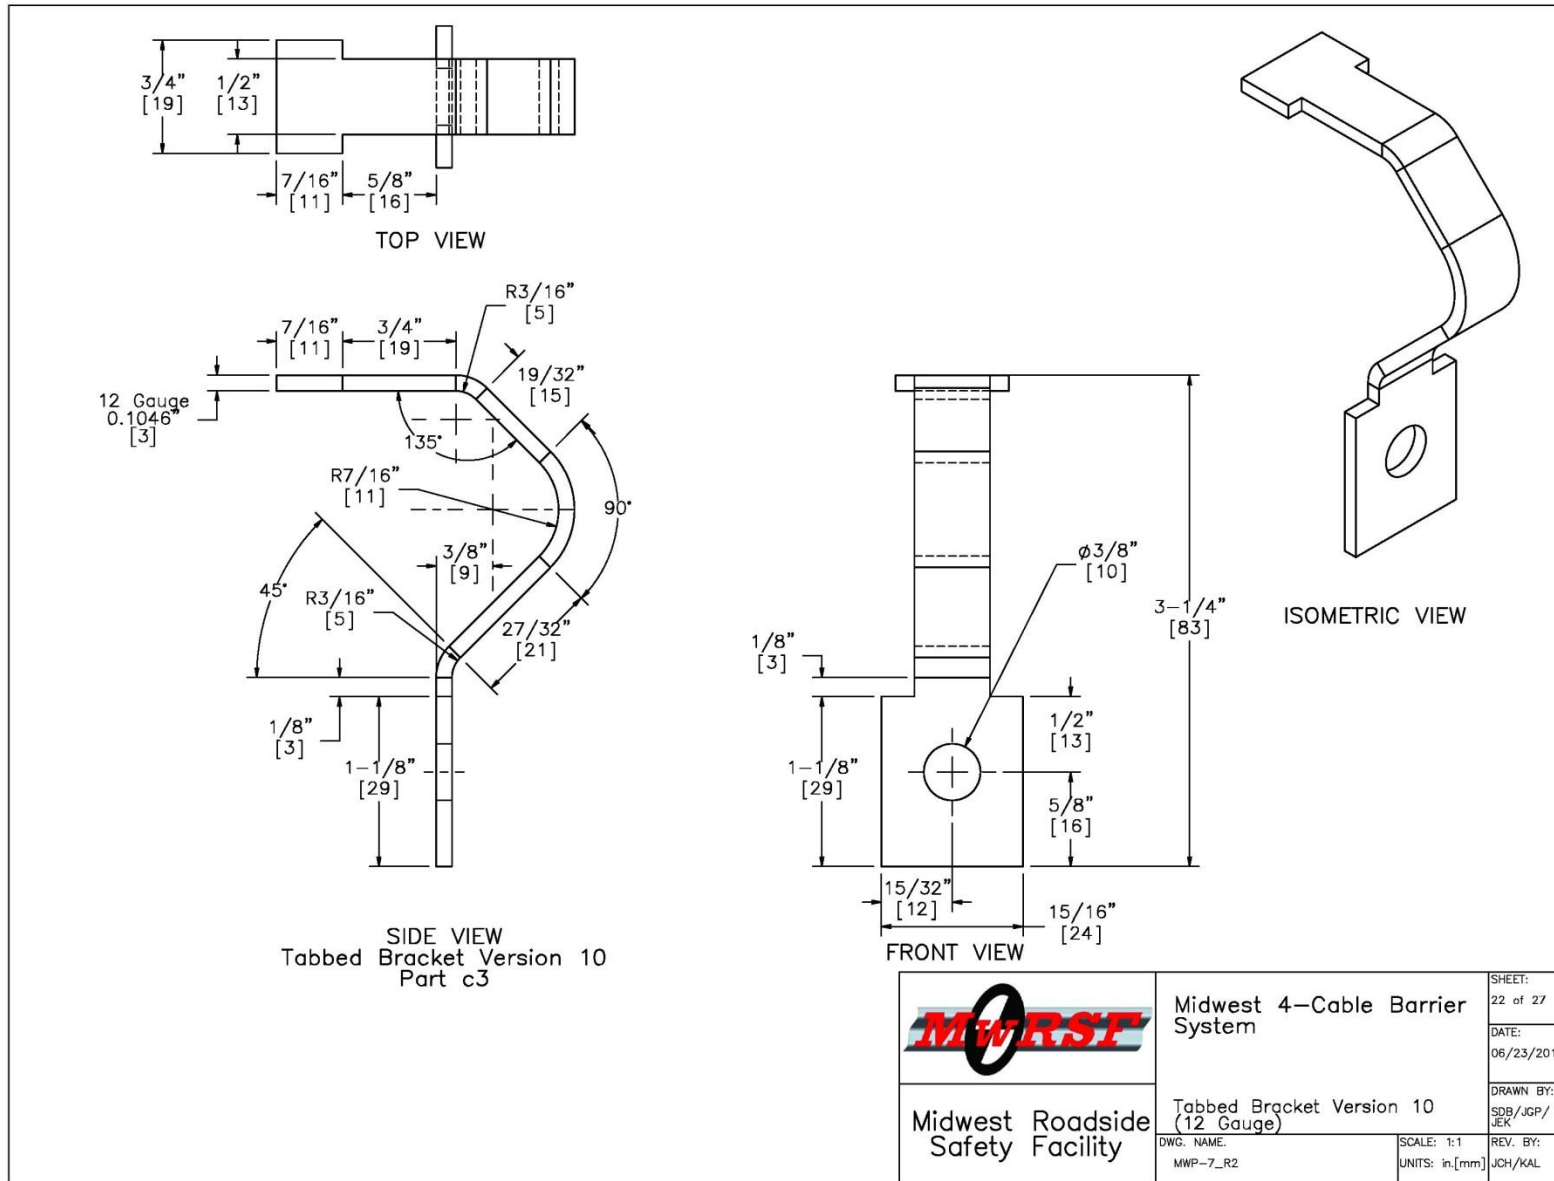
Tabbed Bracket Details, 12-Gauge, Test No. MWP-7
